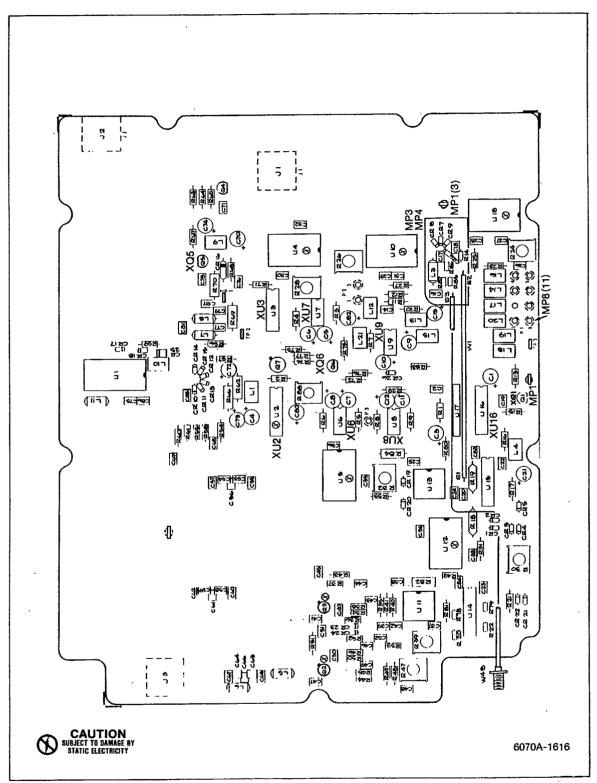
A4A4 Modulator Divider PCB Assembly
